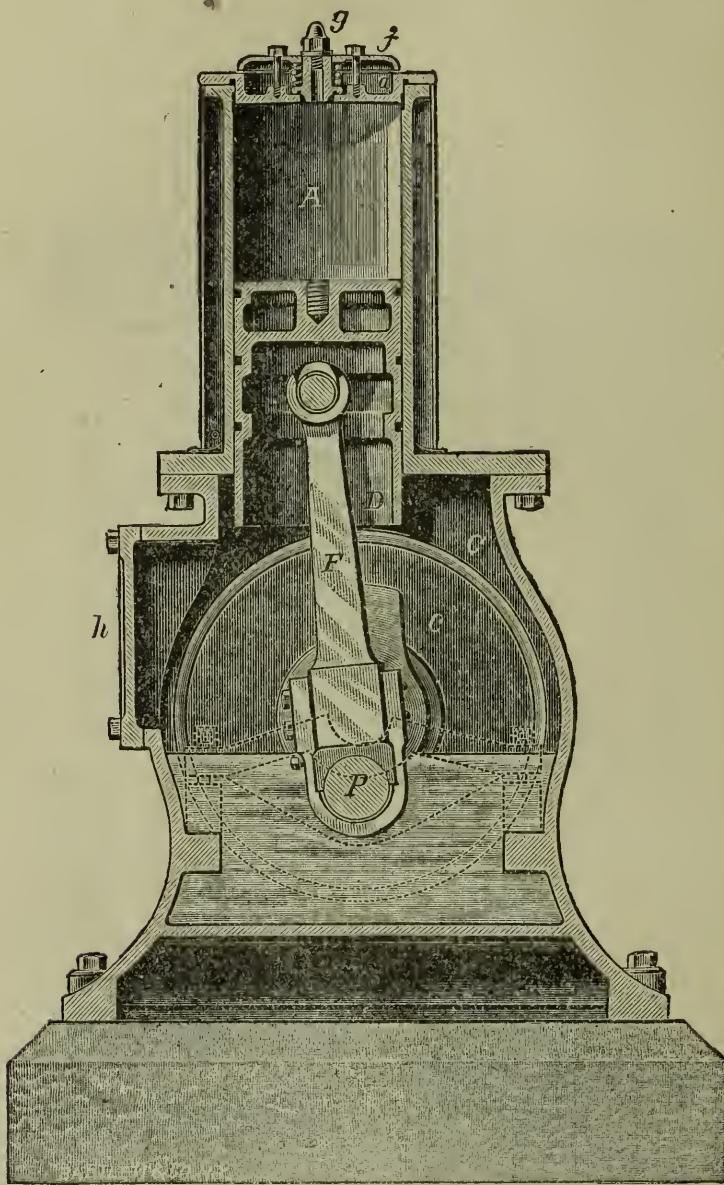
Westinghouse Engine, Cross-section through Cylinder.
